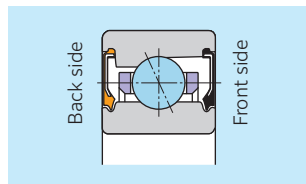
Grease-lubricated sealed standard angular contact ball bearings
